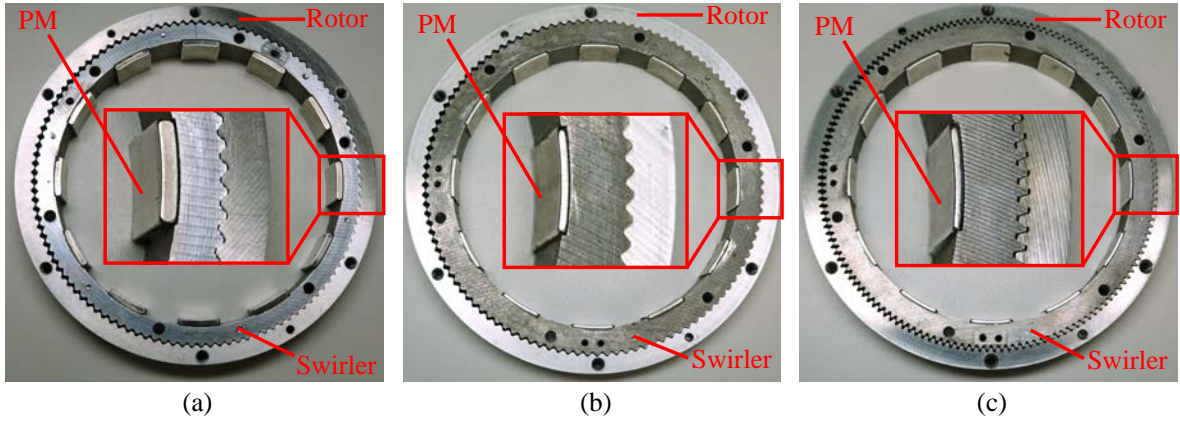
Pictures of fabricated gears of (a) Prototype 1; (b) Prototype 2; (c) Prototype 3.
